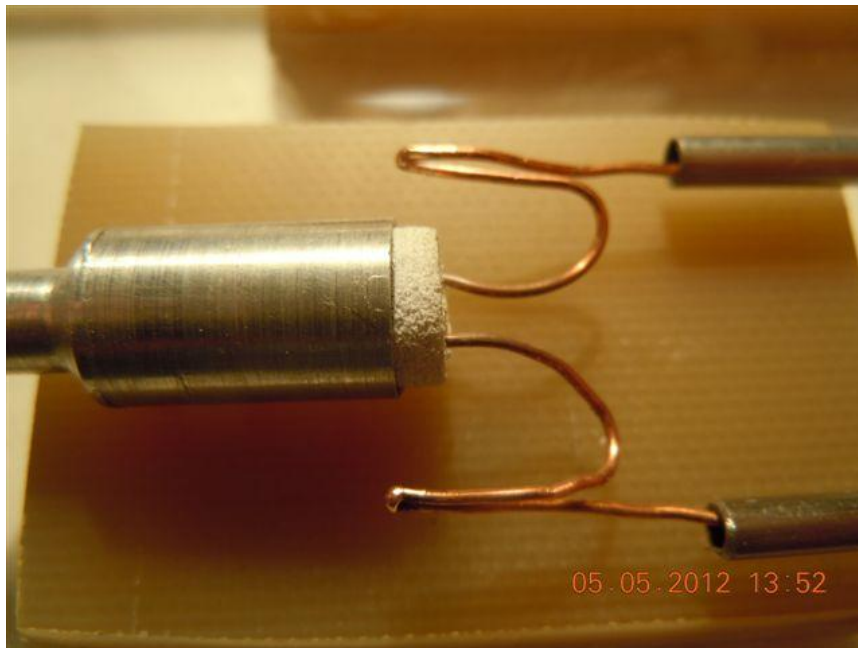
Photo of micro-TIG welds performed on copper wires with a diameter of 0.5 mm for the original junction box prototype.
